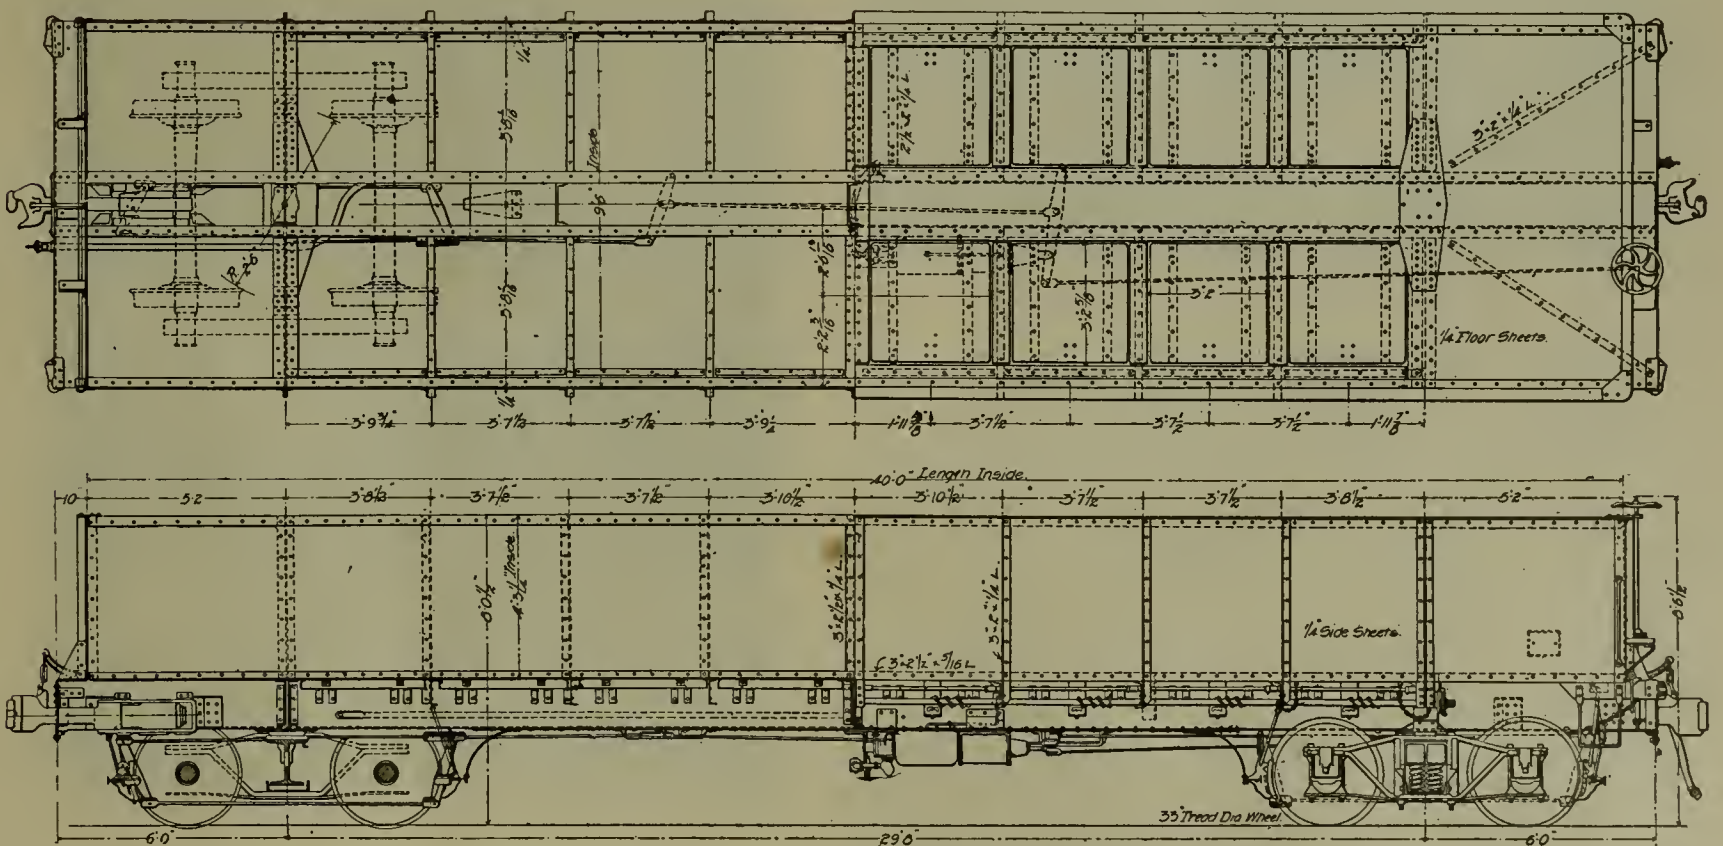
STEEL GONDOLA CAR OF THE C. B. & Q. RY.—PLAN AND SIDE ELEVATION.
